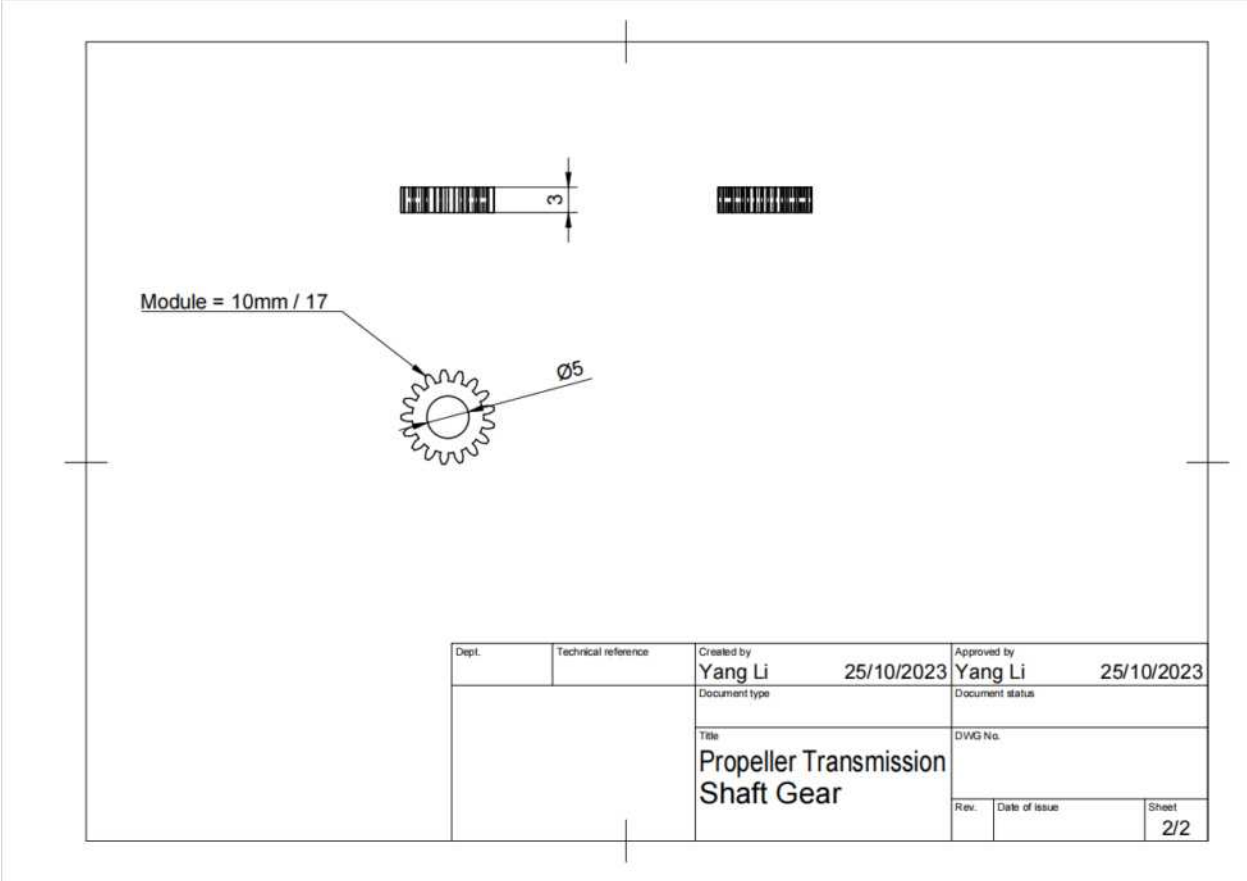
Gear to transfer power from driven gear (Figure 42) to the thrusting propeller.
